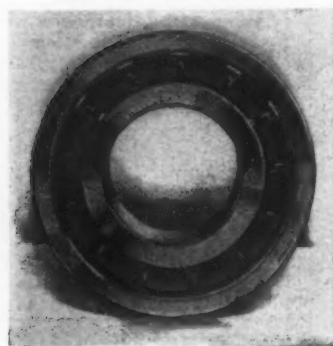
Disk Bearing With Self-Guiding Rollers
